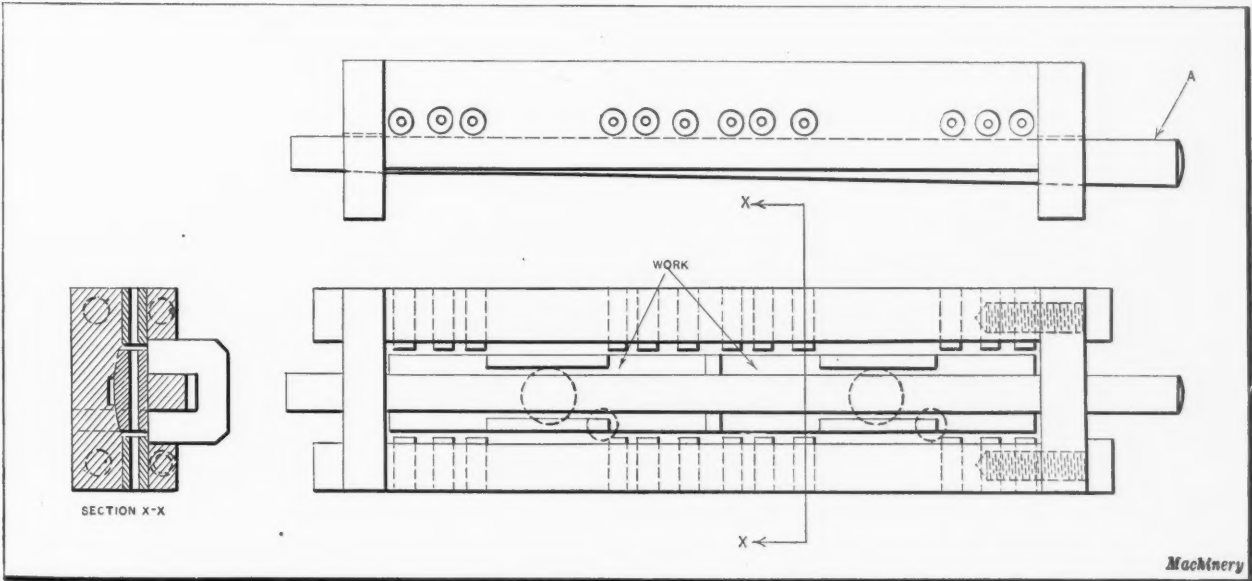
Drill Jig employed in drilling Holes D, E, and F in the Part shown in Fig. 1
